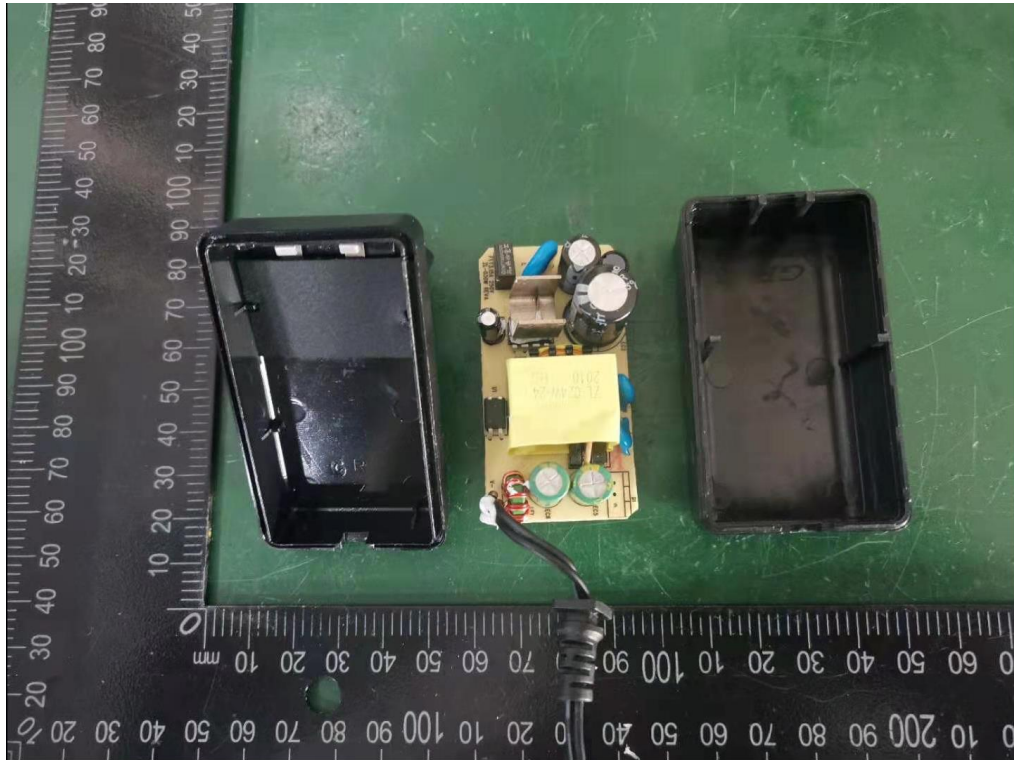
Inside view of unit for model ZL-024WLxxxxyyyEU01
